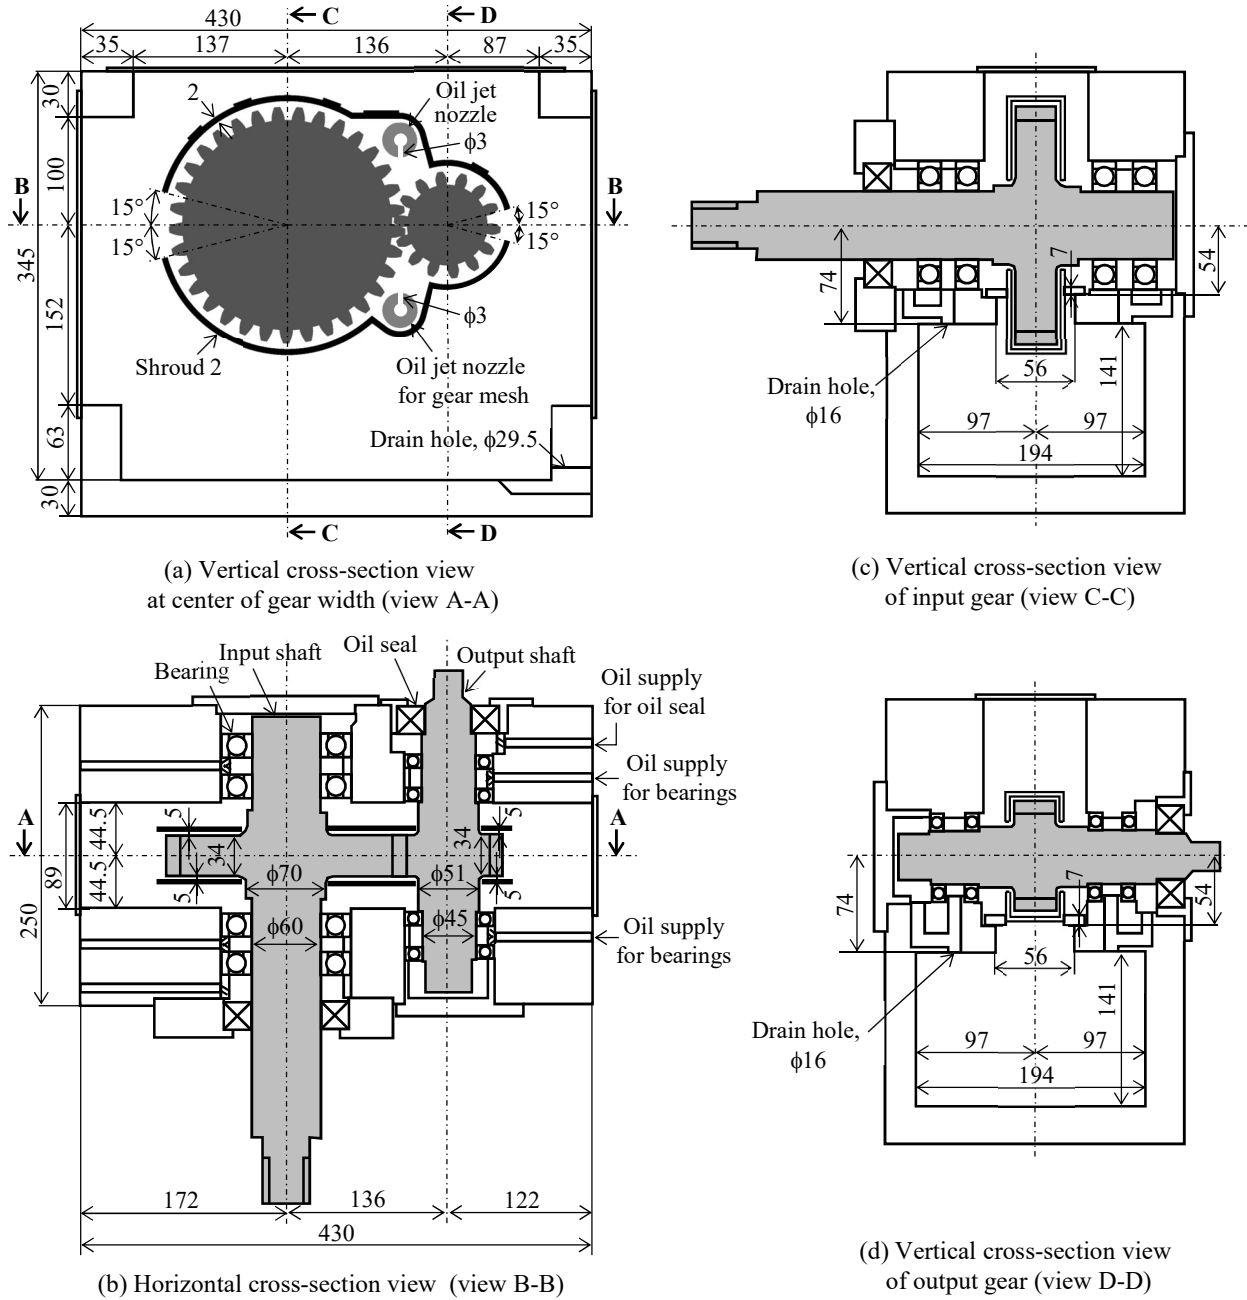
Sections and representative dimensions of the two-axis helical gearbox (GA)
